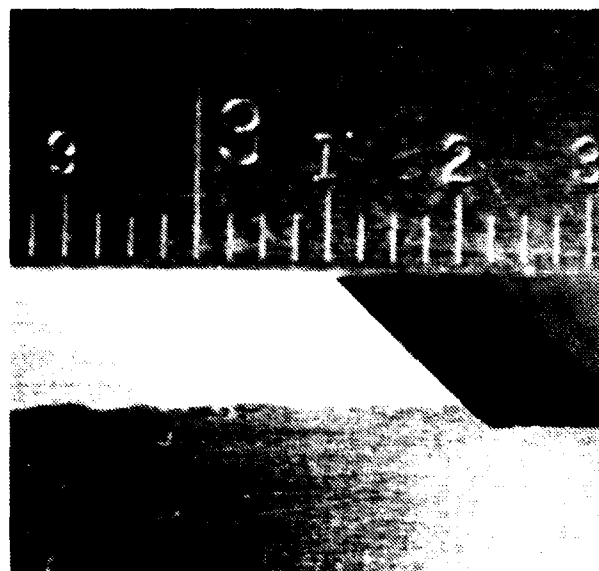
Steel Specimen, painted, right end section, 7.5 X.
